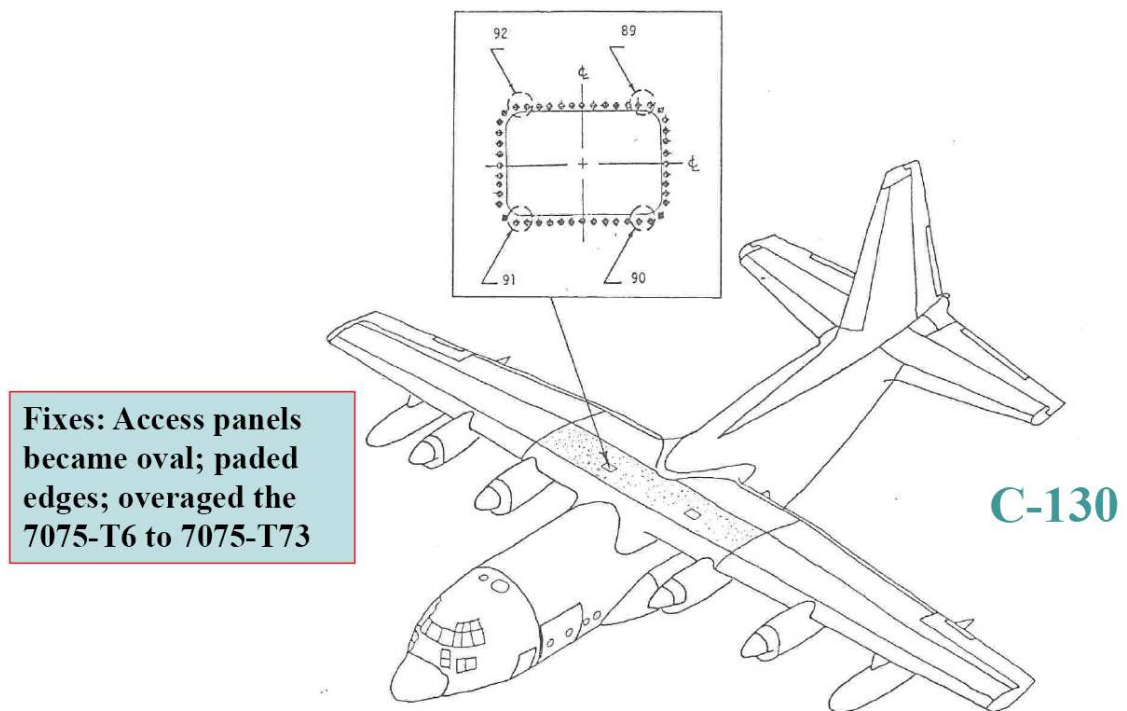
Cracking locations and fixes to C-130 Corrosion Cracks [55]
